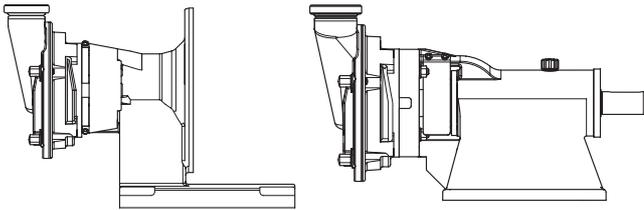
Pump without motor, coupling, or base frame illustrated using models KF and L
